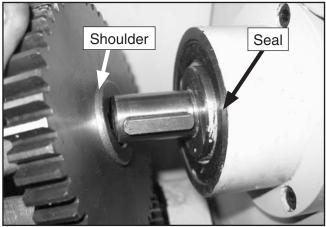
Upper spindle gear positioning. Model G0600 (Mfg. Since 7/11)
